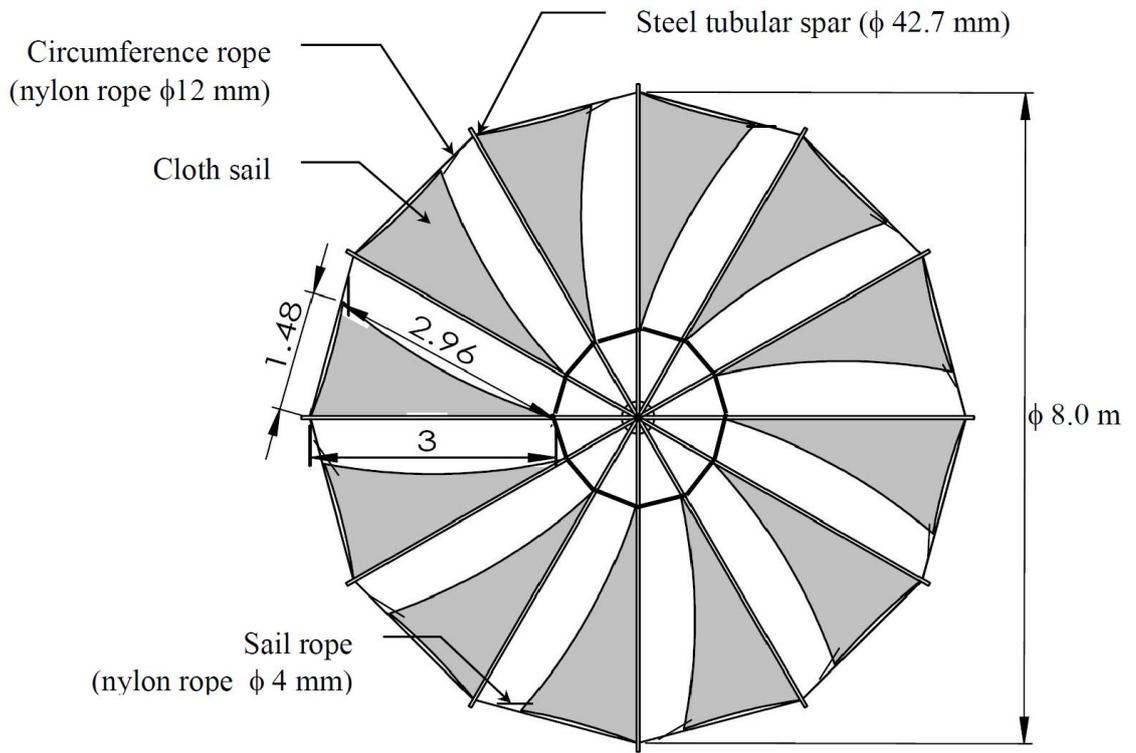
Rotor assembly showing detail of 12 blade Thai sail windmill 12B-T0
